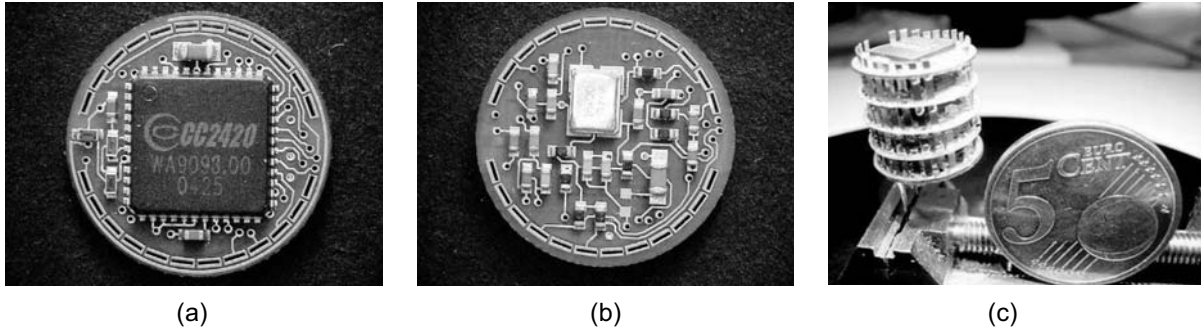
Photographs of (a) top view of the transceiver layer, (b) bottom view of the transceiver layer and (c) the manufactured prototype sensor
